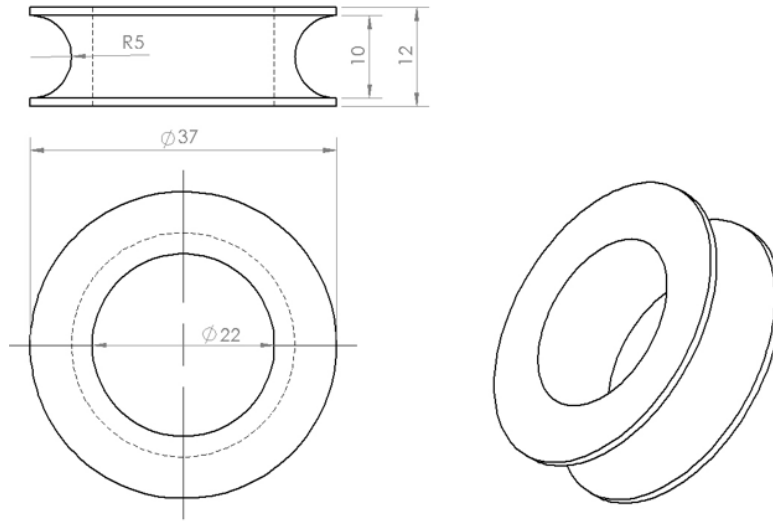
Al-2024 notched compression ring original design (dimensions in mm)
